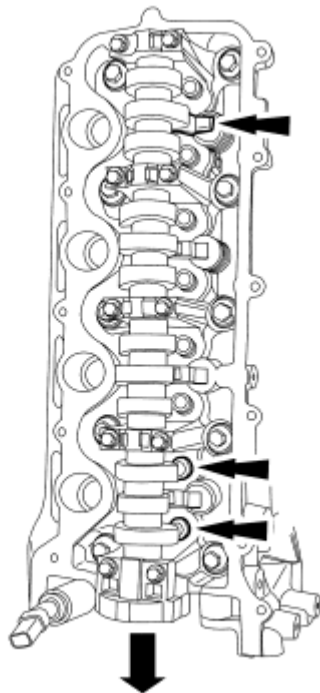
Locating LH Cylinder Head Camshaft Roller Followers And Bolts
